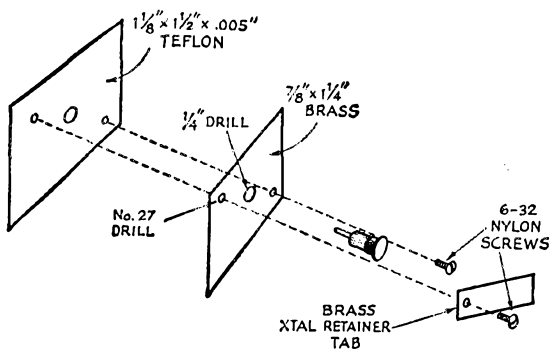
Details of the mixer crystal mounting and u.h.f. bypass capacitor. These mount on the left edge of the i.f. output section, as seen in the bottom view. Locations of the mounting holes are not critical, so long as these and the mating holes in the mixer assembly line up. The center of hole D should line up with the center line of partition F.
